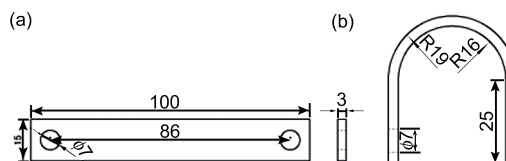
Schematic drawing and dimensions of U-bend sample (mm): (a) before U-bend, (b) after U-bend
